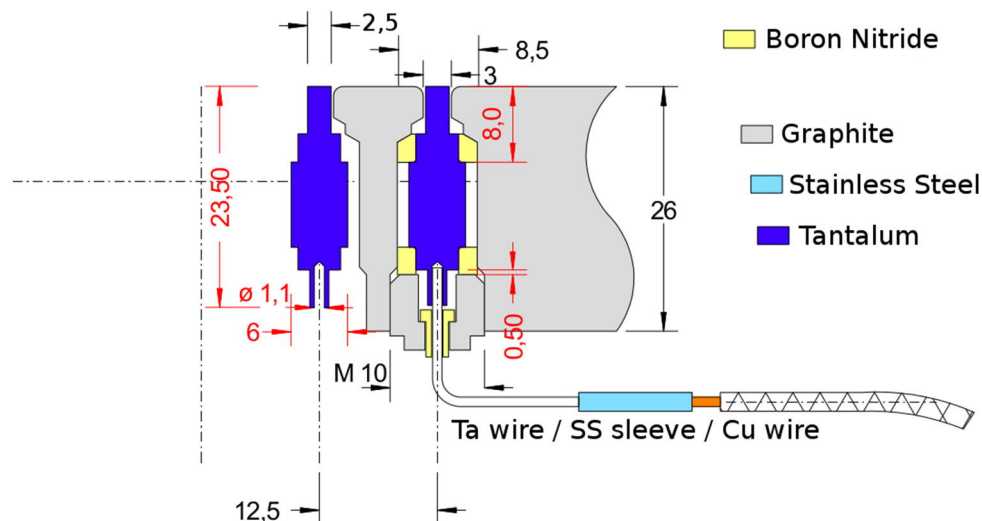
Schematic of the WEST divertor flush-mounted LP with dimensions in mm.
